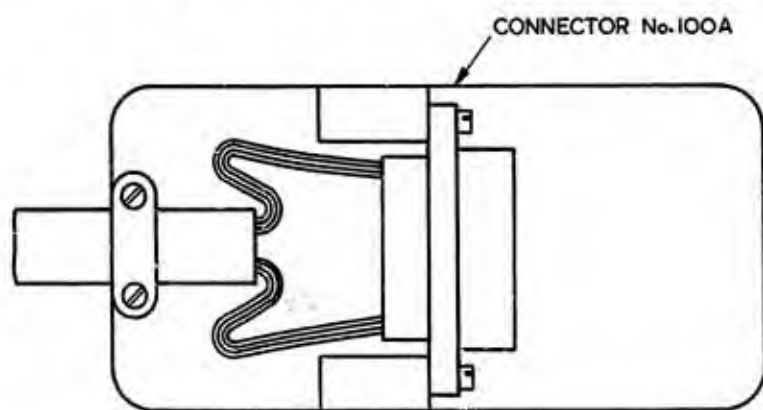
CONNECTOR BODY SECURED TO THE BASE OF THE HOUSING WITH FIXING SCREWS. CABLE CLAMP FITTED.
